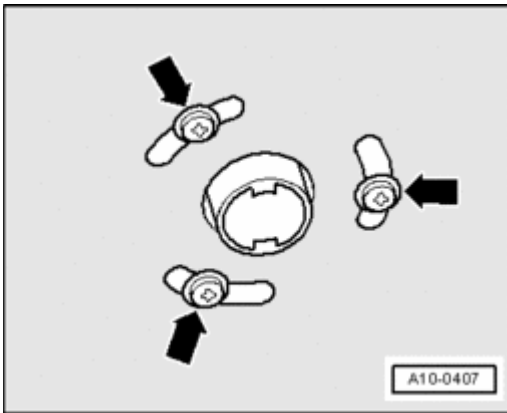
Removing Bolts Securing Exhaust Pipe Of Auxiliary/Additional Heater To Sound Insulation
